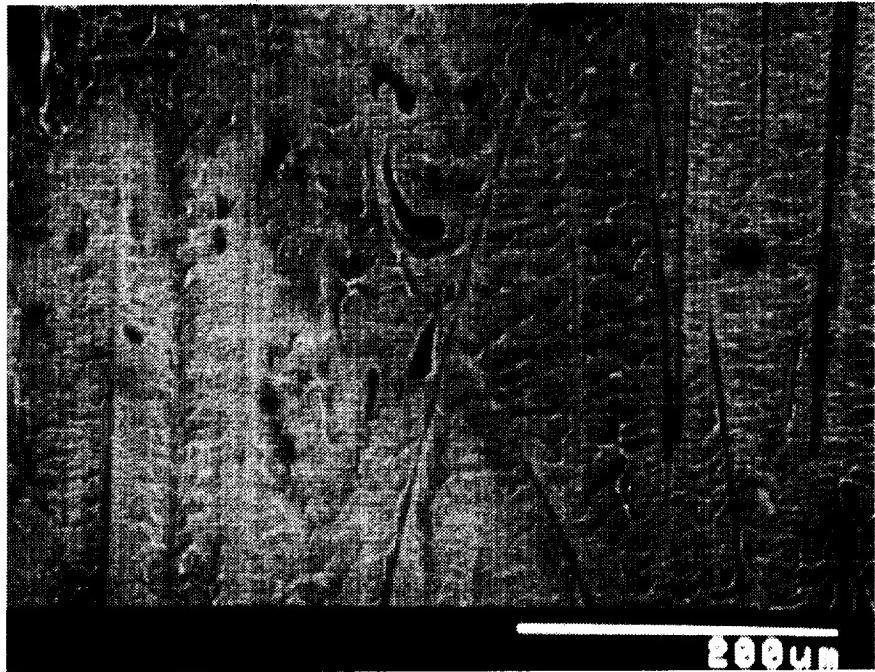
Surface Fracture of 10 second Weld at 1.75kW, 120kHz and 0.689Mpa.
